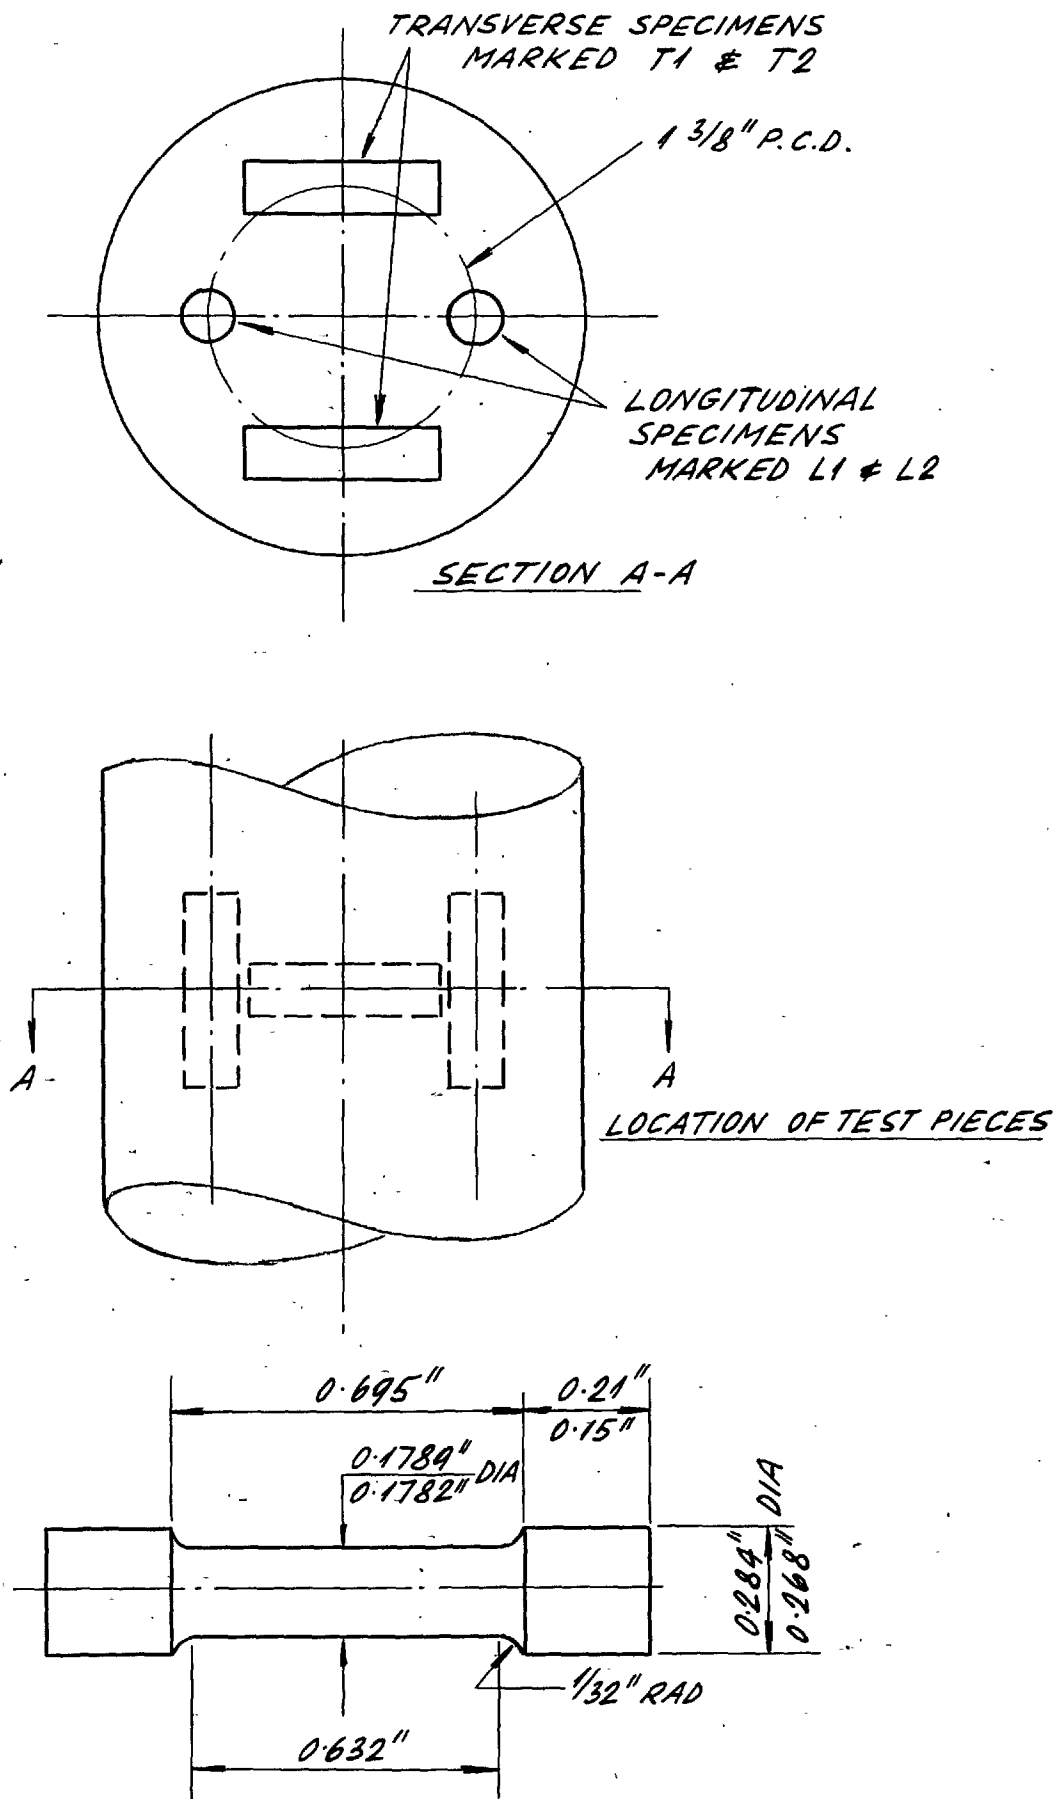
HOUNSFIELD No. 1 TENSILE TEST PIECE.
